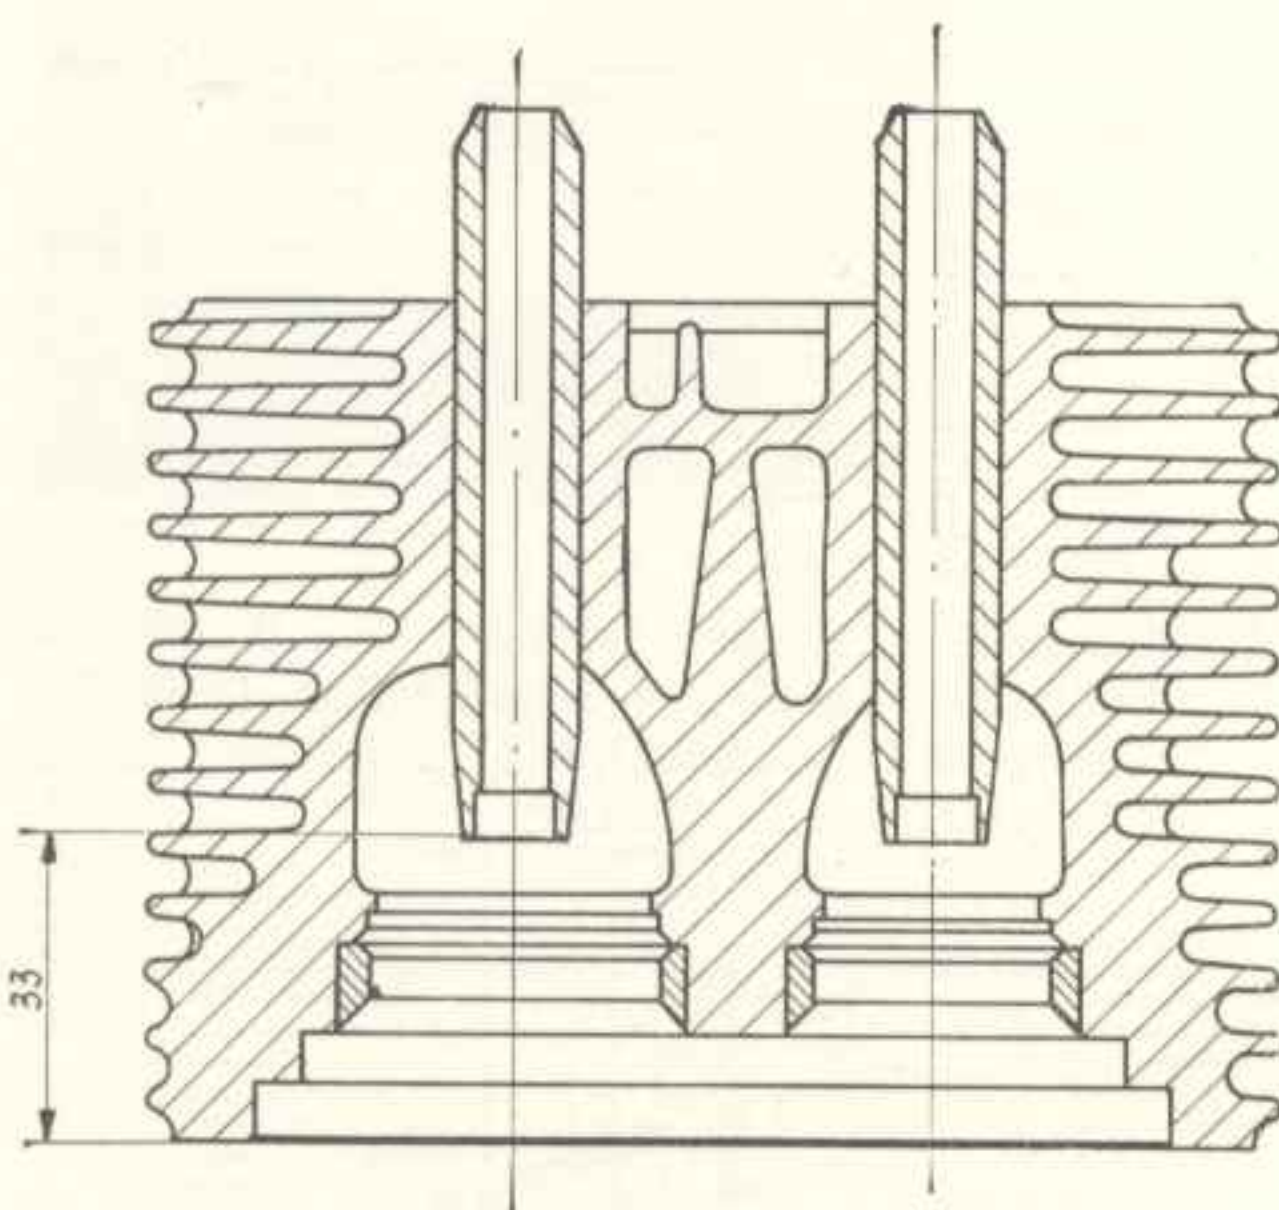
A small, dark, rectangular object, possibly a component or part of a machine, shown in a technical drawing style.
